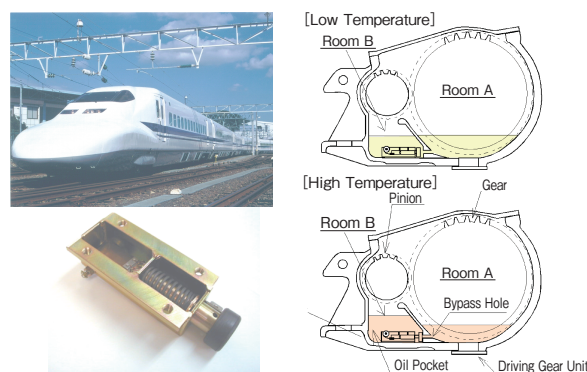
Automatic oil volume adjusting unit for Shinkansen driving gear. (courtesy of Toyo Denki Seizo)
